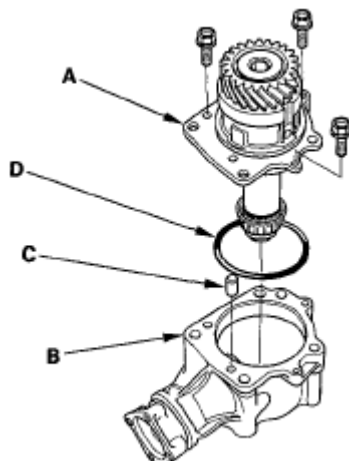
Identifying Transfer Holder Assembly, Transfer Housing, Dowel Pin And O-Ring
